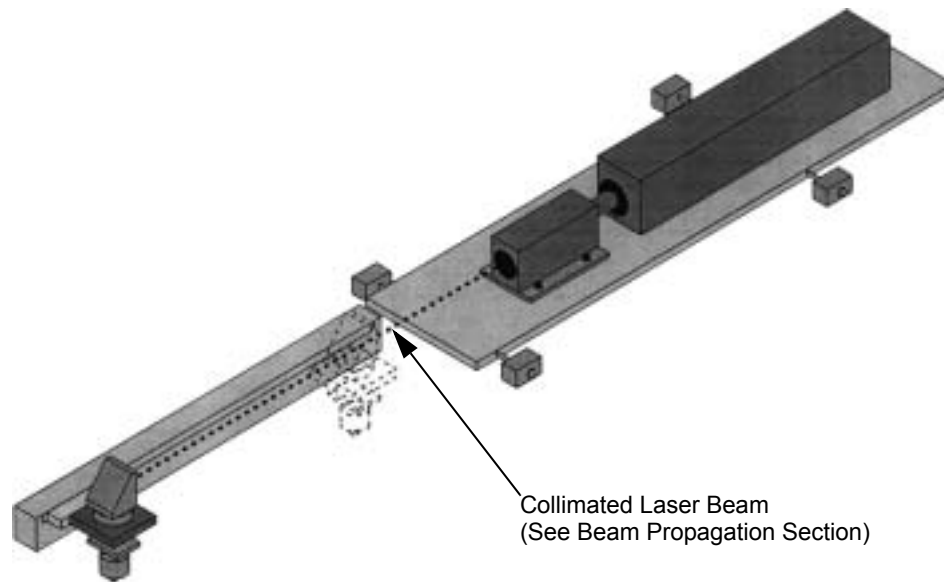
Laser and Additional Optics on Adjustable Mounting Plate
